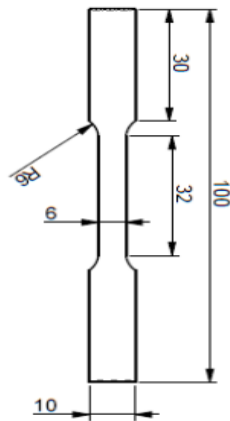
Geometry of tensile test specimens (dimensions in mm)
